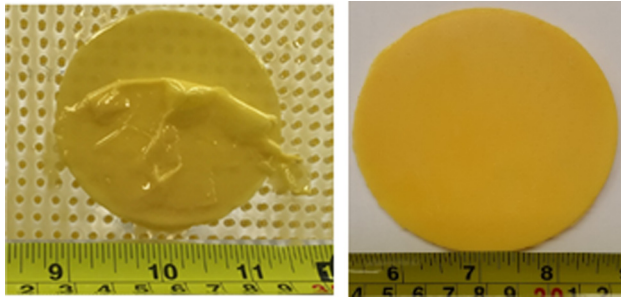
Pictures of printed parts: (left) part failed at second layer using the conventional constrained surface; (right) part successfully printed with a thickness of 1.5 mm and a diameter of 90 mm using the newly developed air-diffusion-channel-based constrained surface
